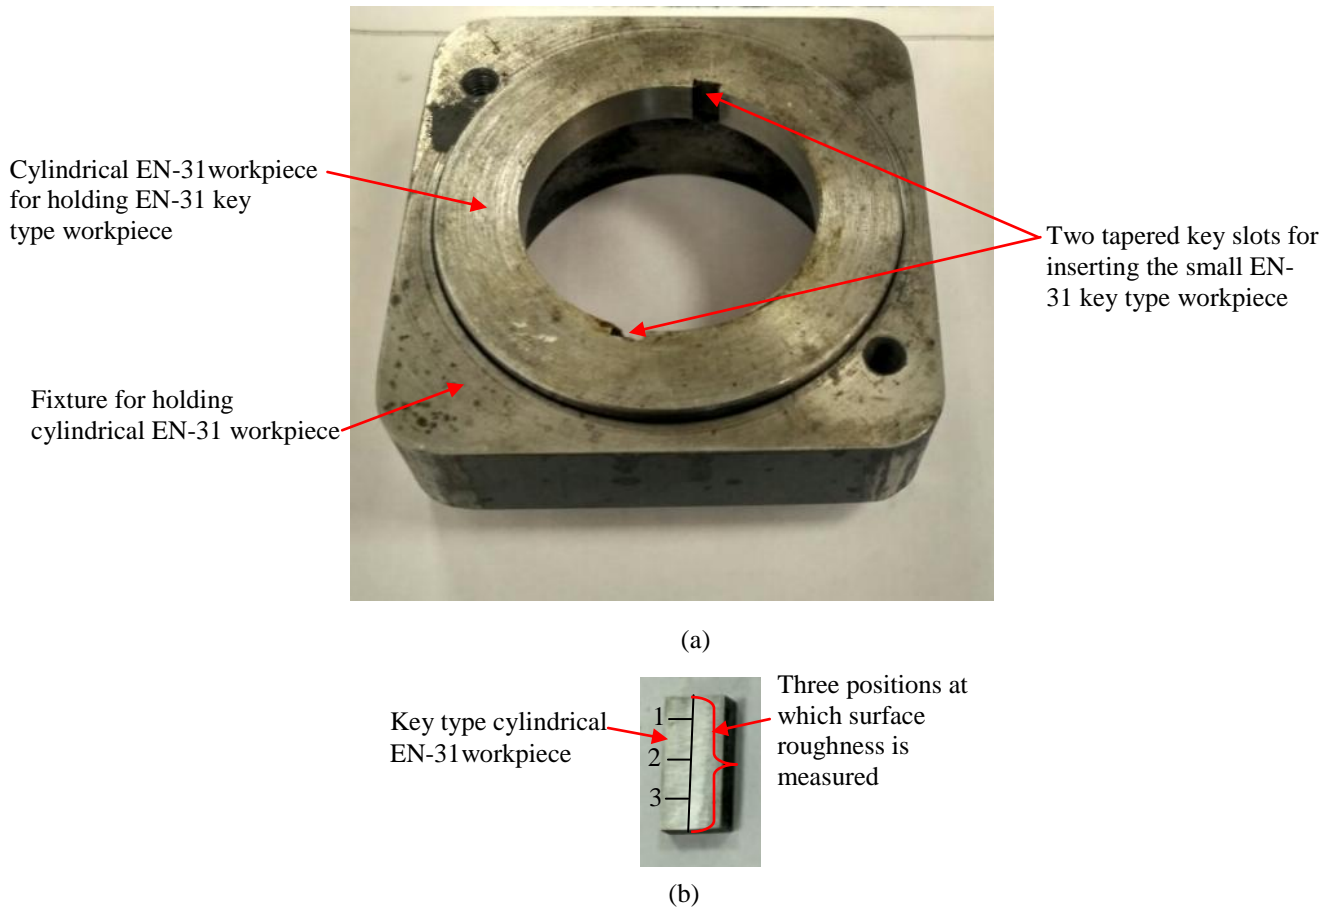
Photograph of (a) cylindrical ferromagnetic EN-31 steel workpiece having two key slots along with its fixture and (b) cylindrical key type EN-31 workpiece.
